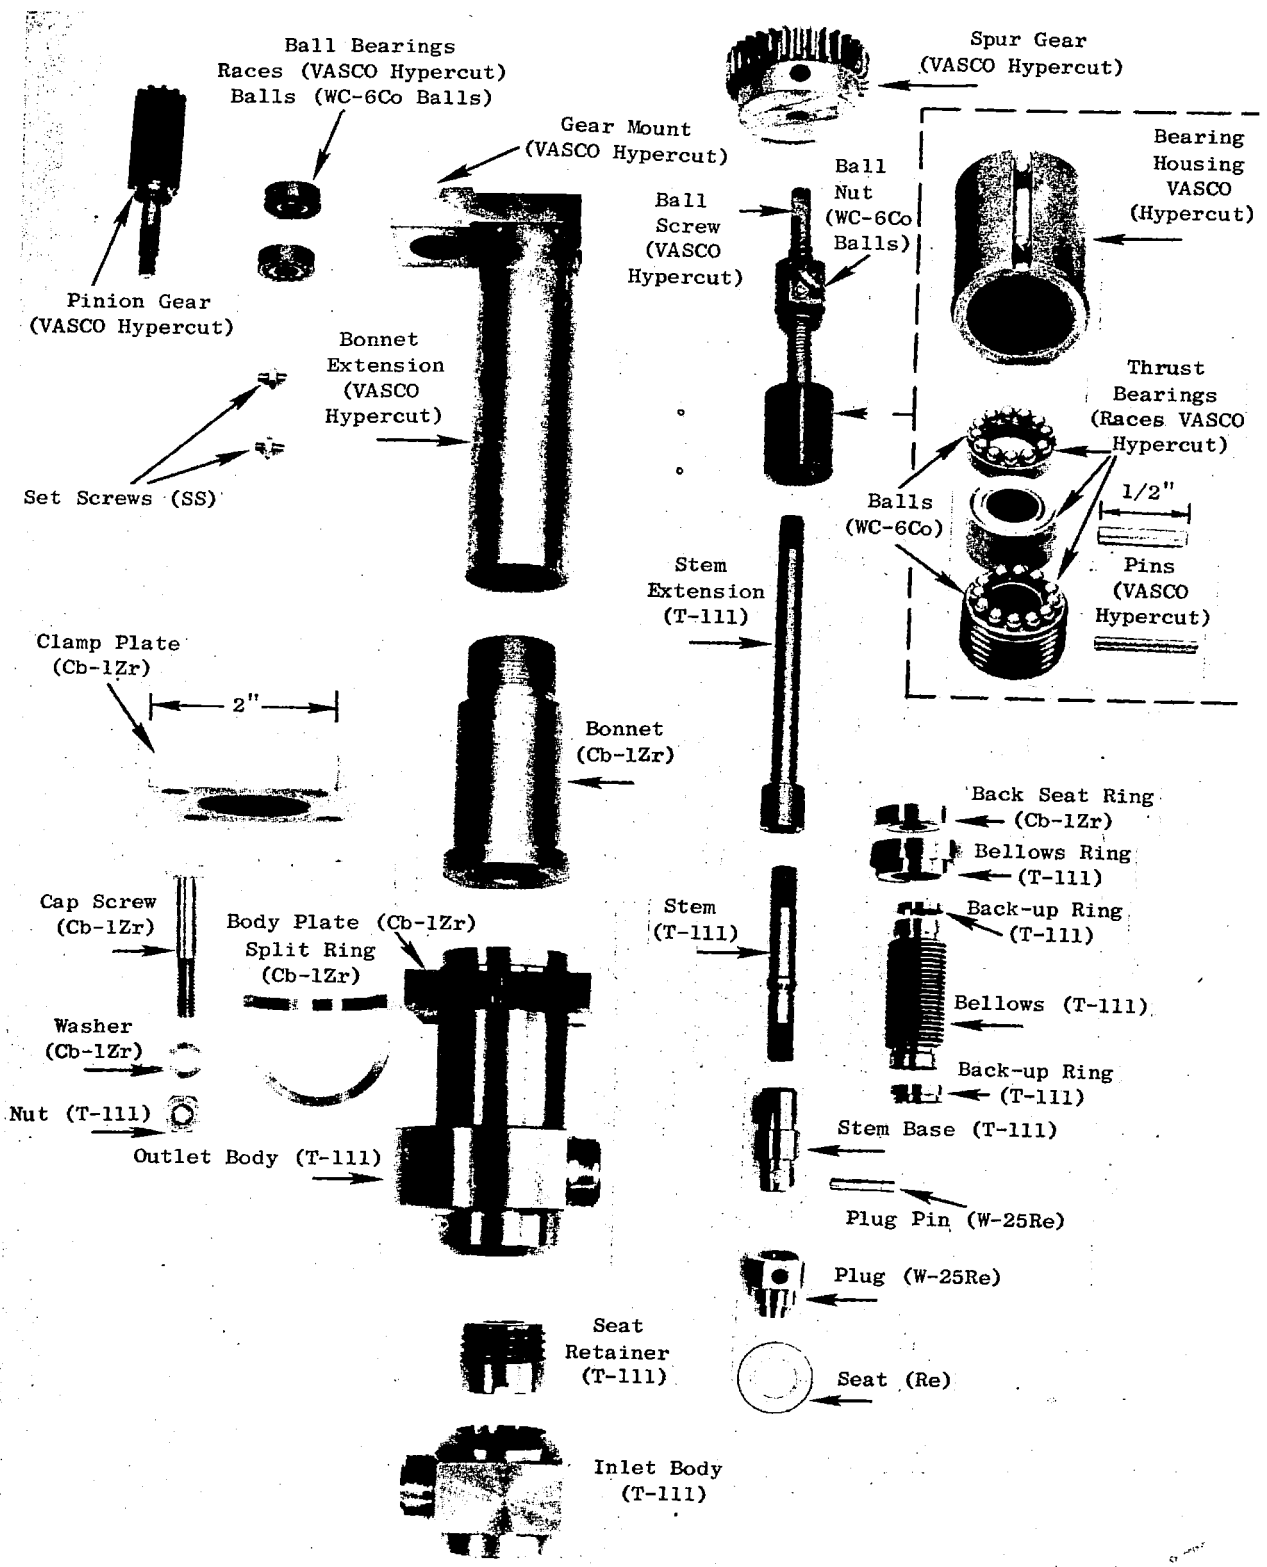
High Temperature Alkali Metal Valve Parts Before Assembly. (P69-8-15)
